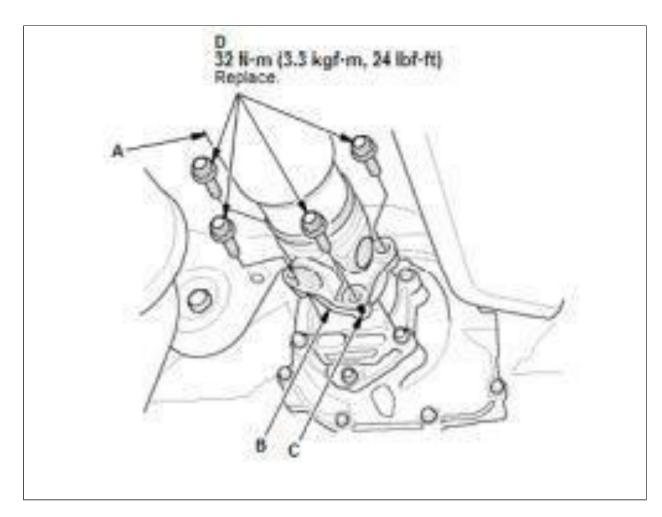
Reference Mark Placement And No. 2 Propeller Shaft Flange Bolts
